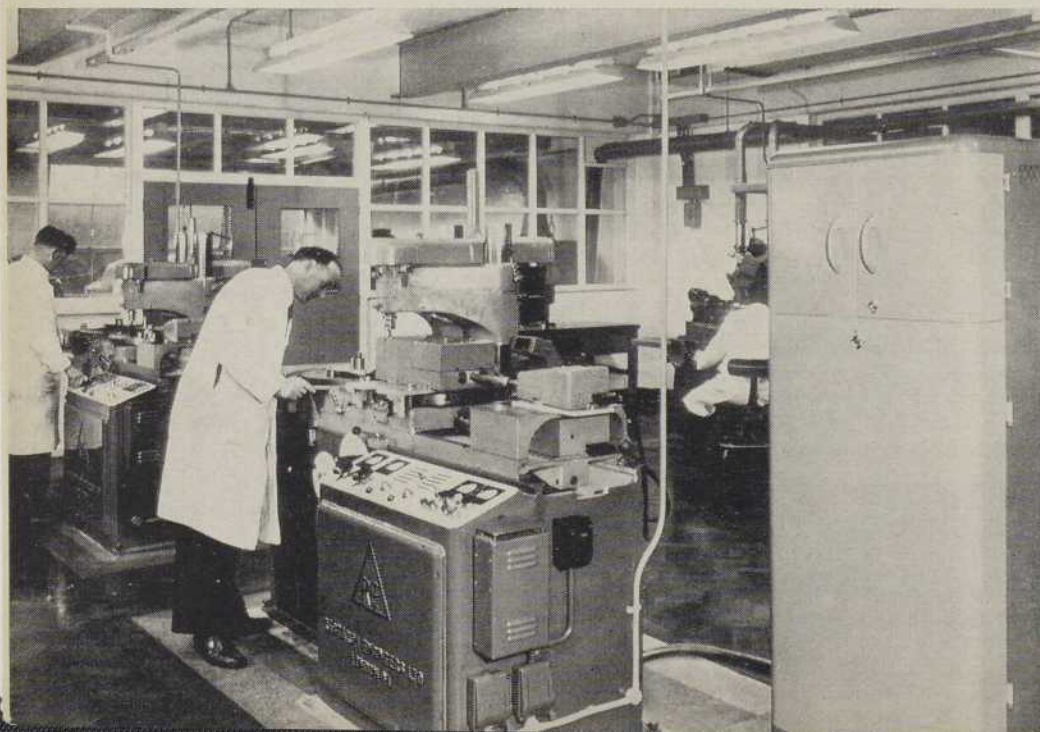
ELECTRONIC MACHINE TOOL CONTROL USING AN ELECTRONIC "MASTER SIMULATOR" WITH PERFORATED TAPE FED IN TO CONTROL THE MILLING CUTTER.
